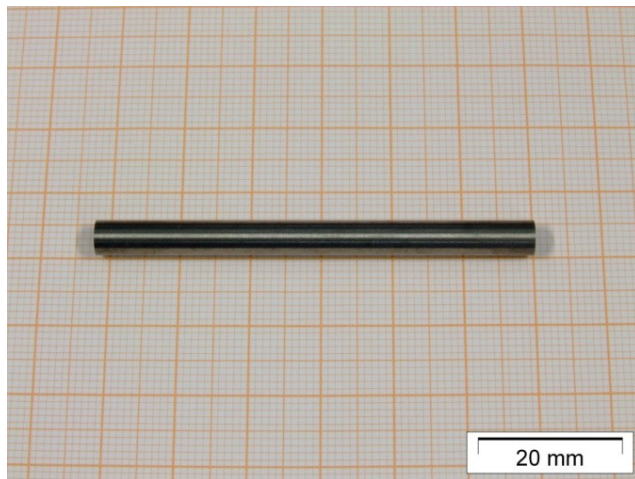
Specimen geometry S5 (Cylindrical rod, diameter = 4.95 mm)
